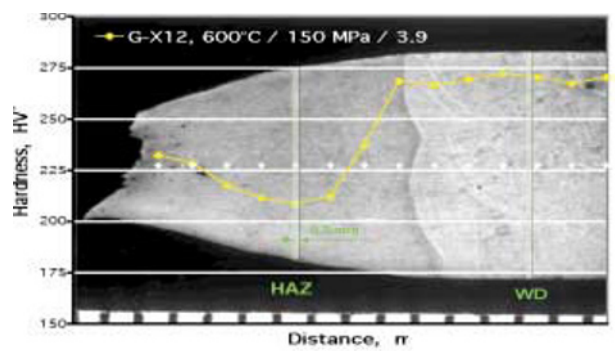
Fracture location and hardness profile of weld sample: specimen no. 23/24 (from Fig. 1).
